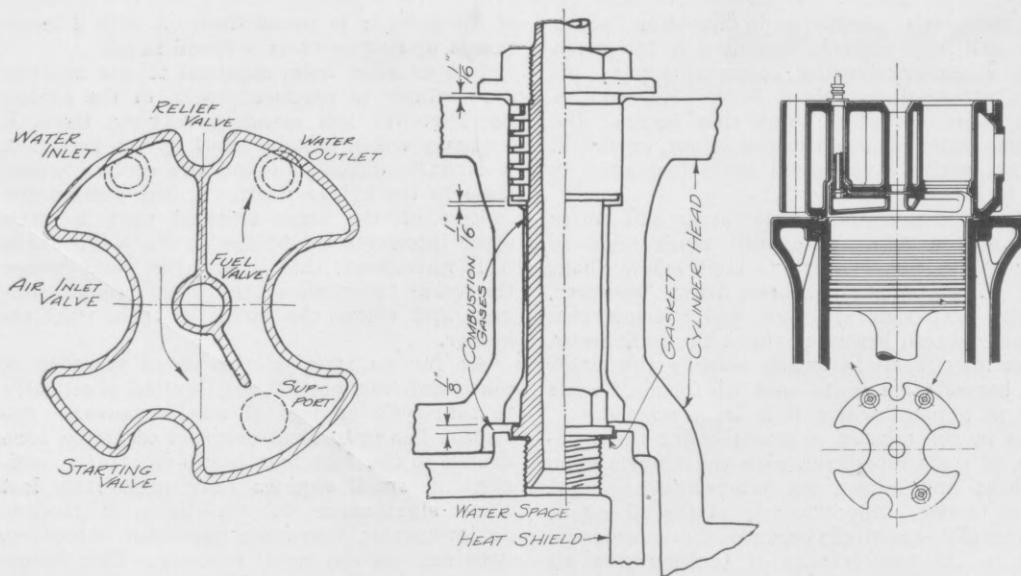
Heat shield made of hollow casting laid against cylinder head
